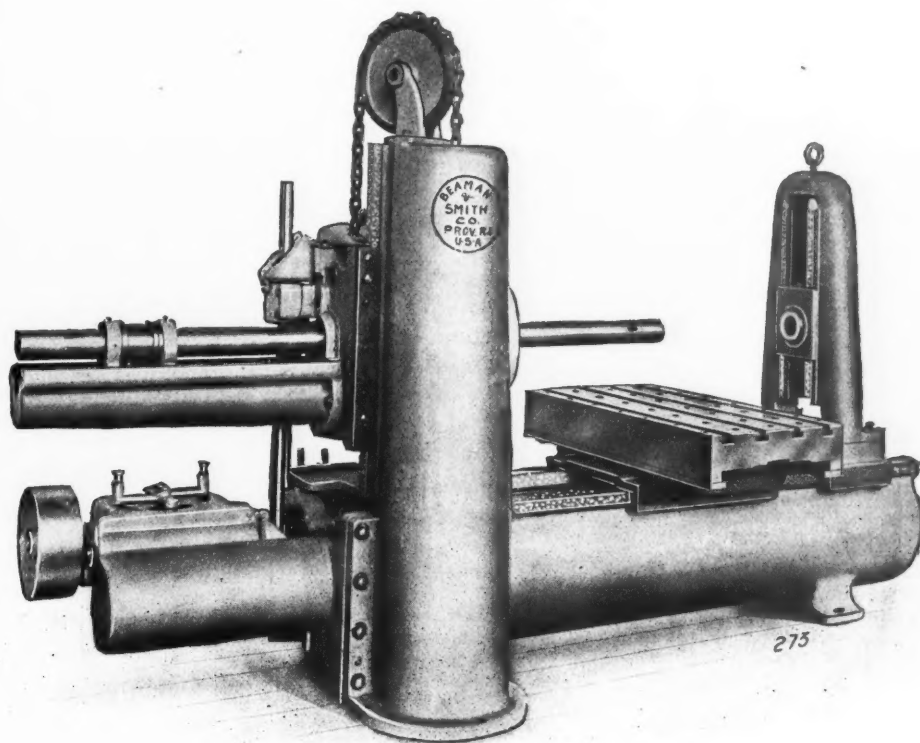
Rear View showing Tubular Section used throughout in the Construction of Machine Members
